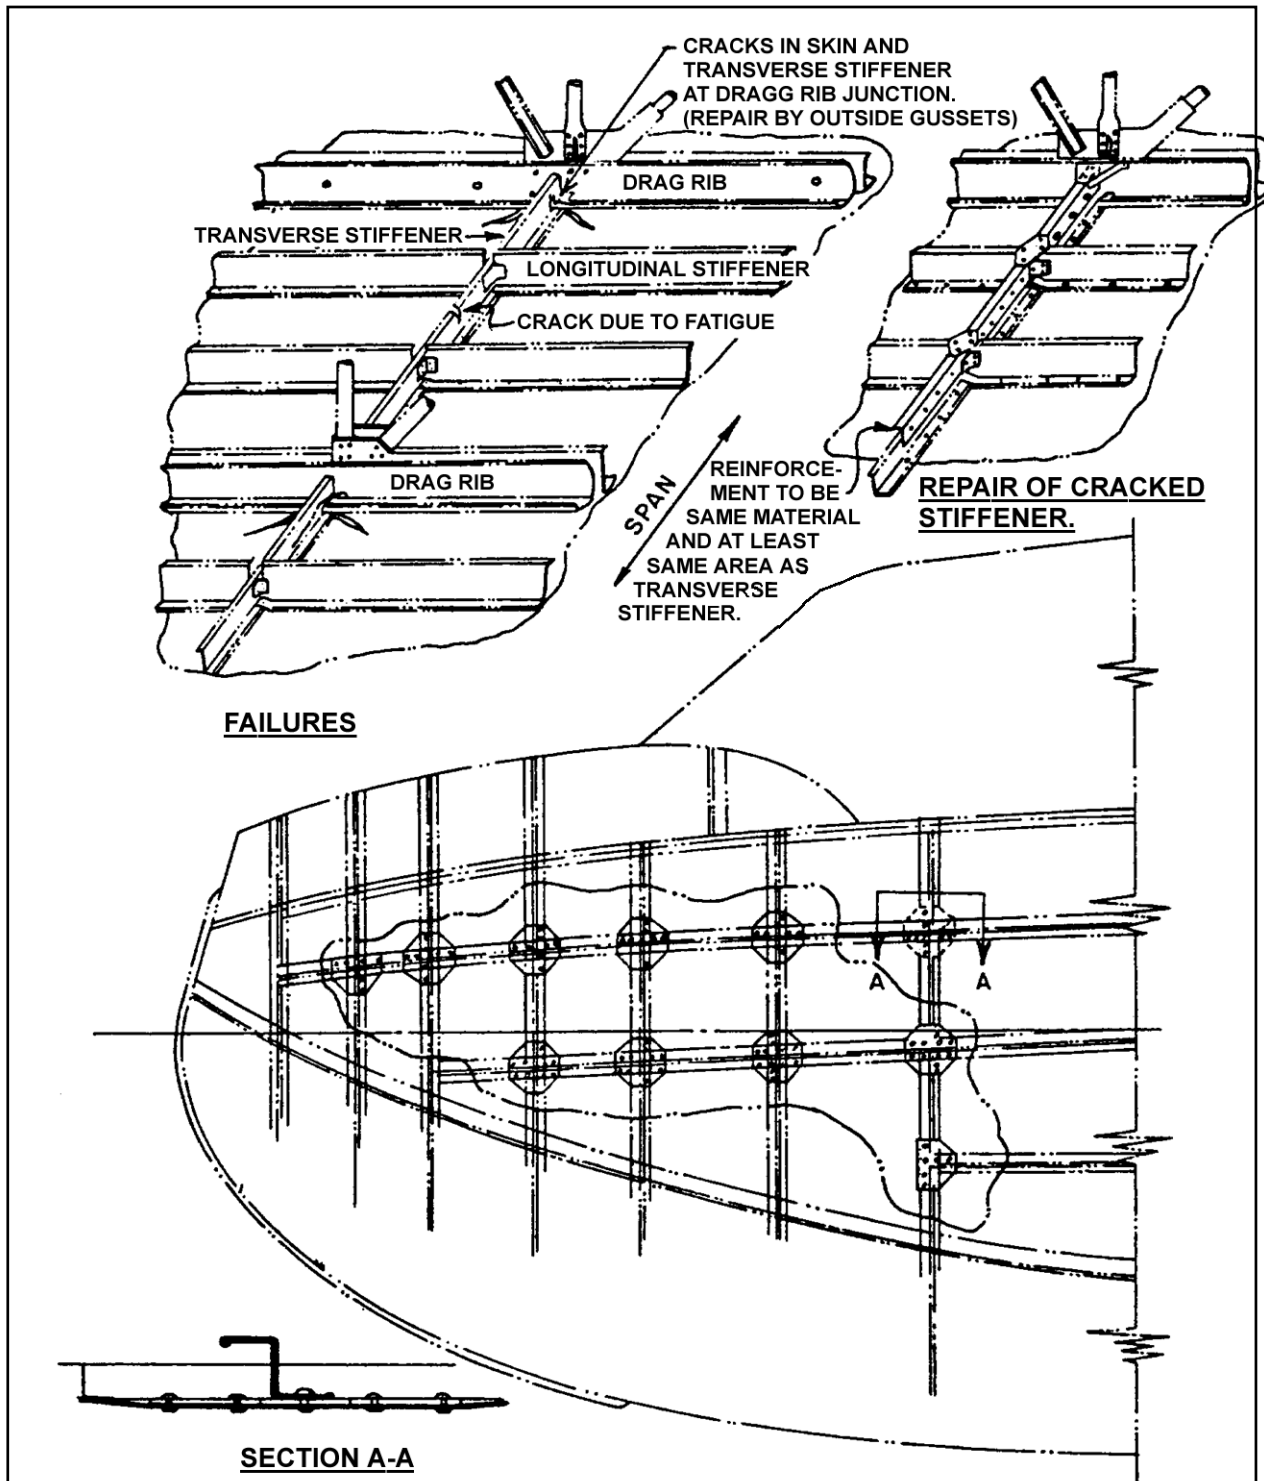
Typical methods of repairing cracked frame and stiffener combination.
